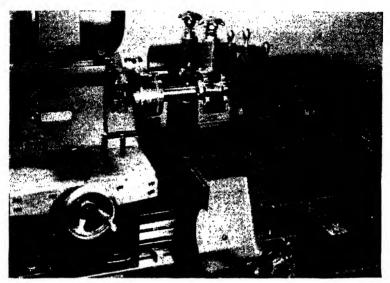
Two-spindle Ex-Cell-O single-point boring machine at work on airplane-engine connecting rod.
